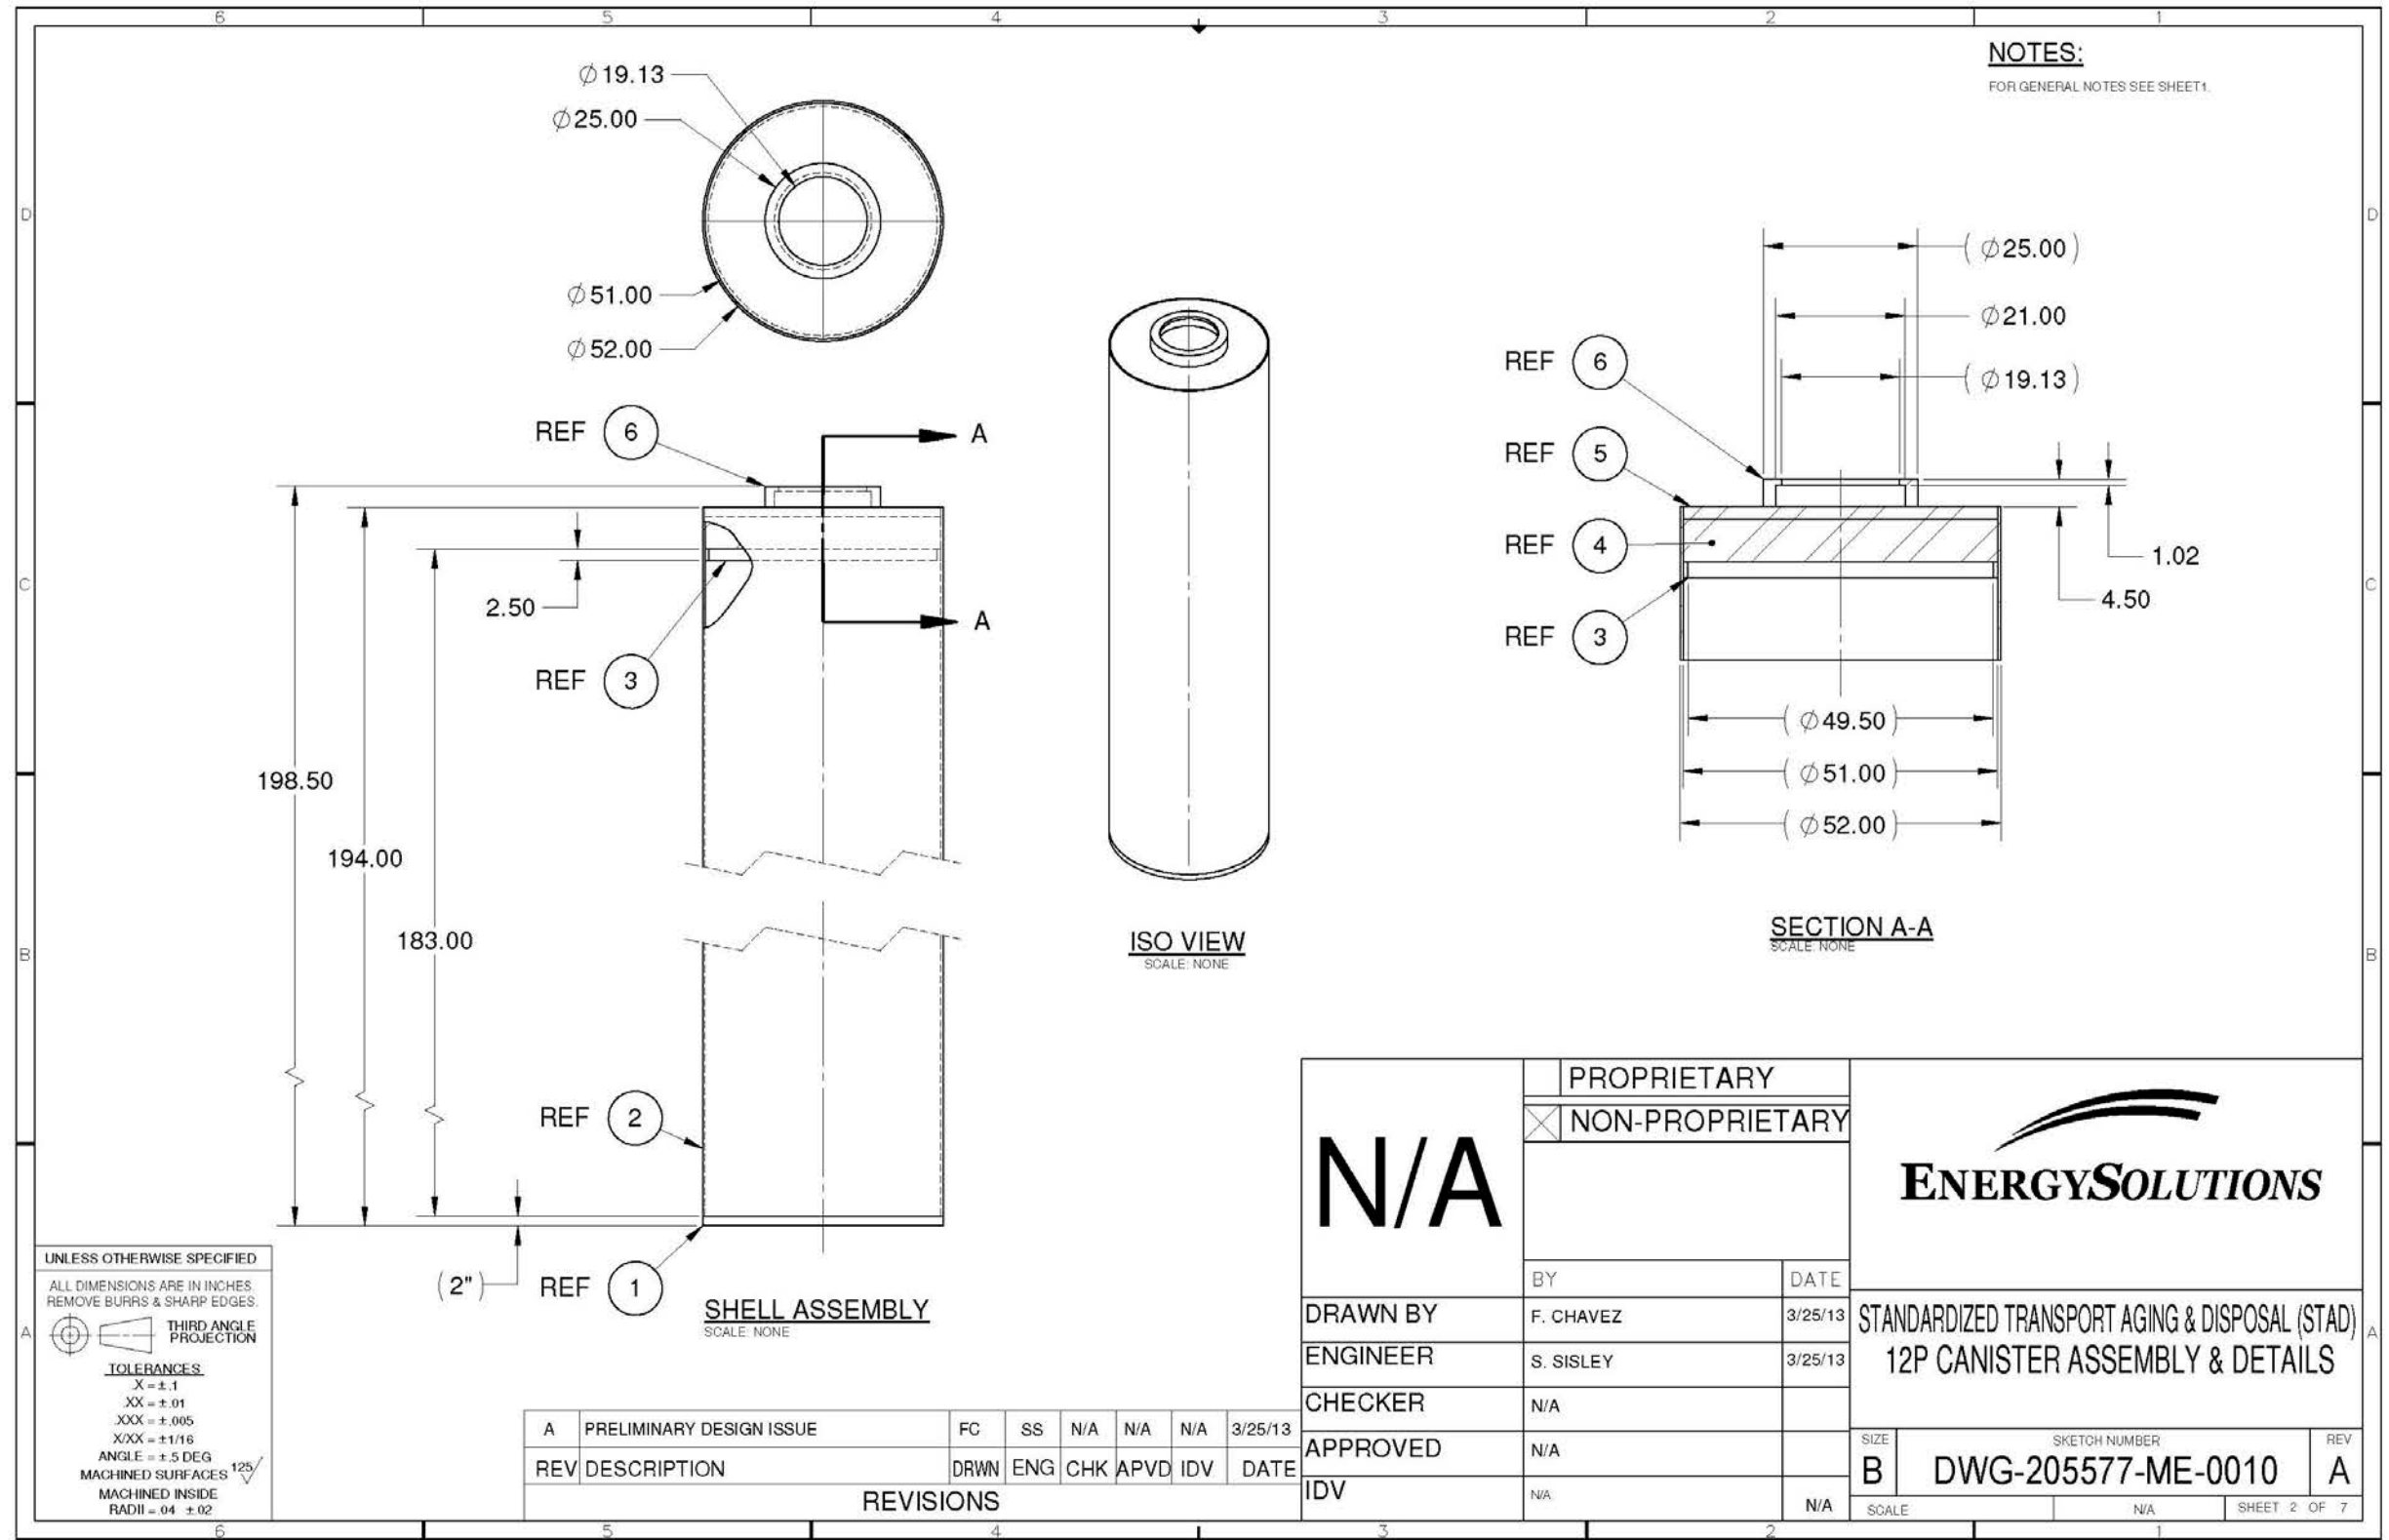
Standardized Transport, Aging and Disposal Canister - 12 PWR Assemblies - Assembly & Details – Sheet 3 of 7
